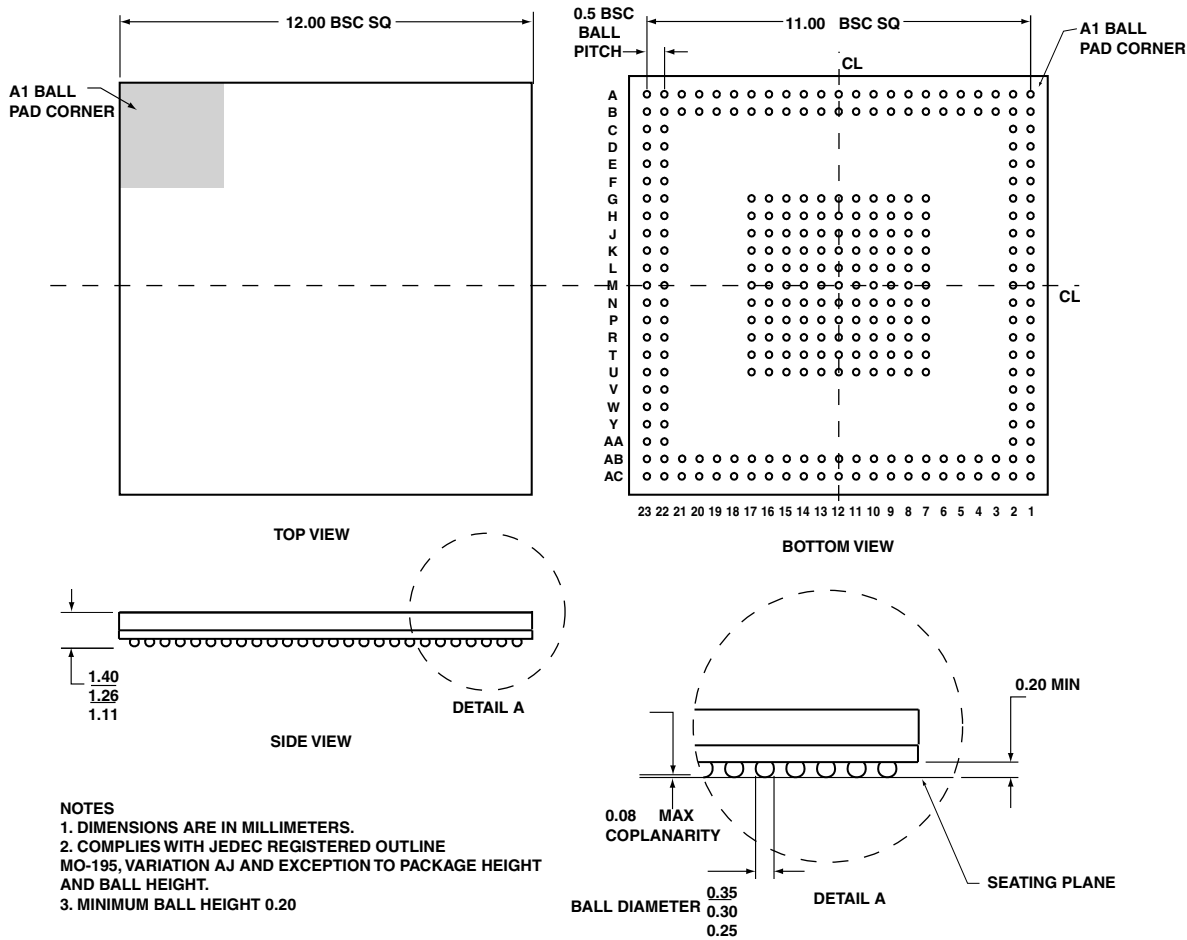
289-Ball CSP_BGA (BC-289-2)
